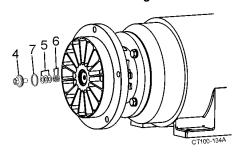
2085 LR Install Shims, Washers, Impeller Retainer with O-Ring
